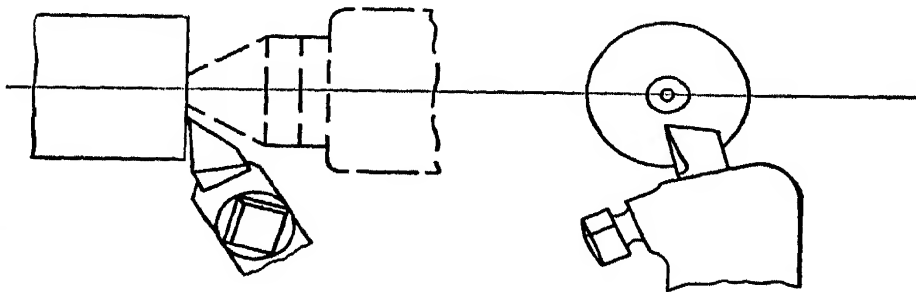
The position of the cutter for facing the end of a workpiece.
